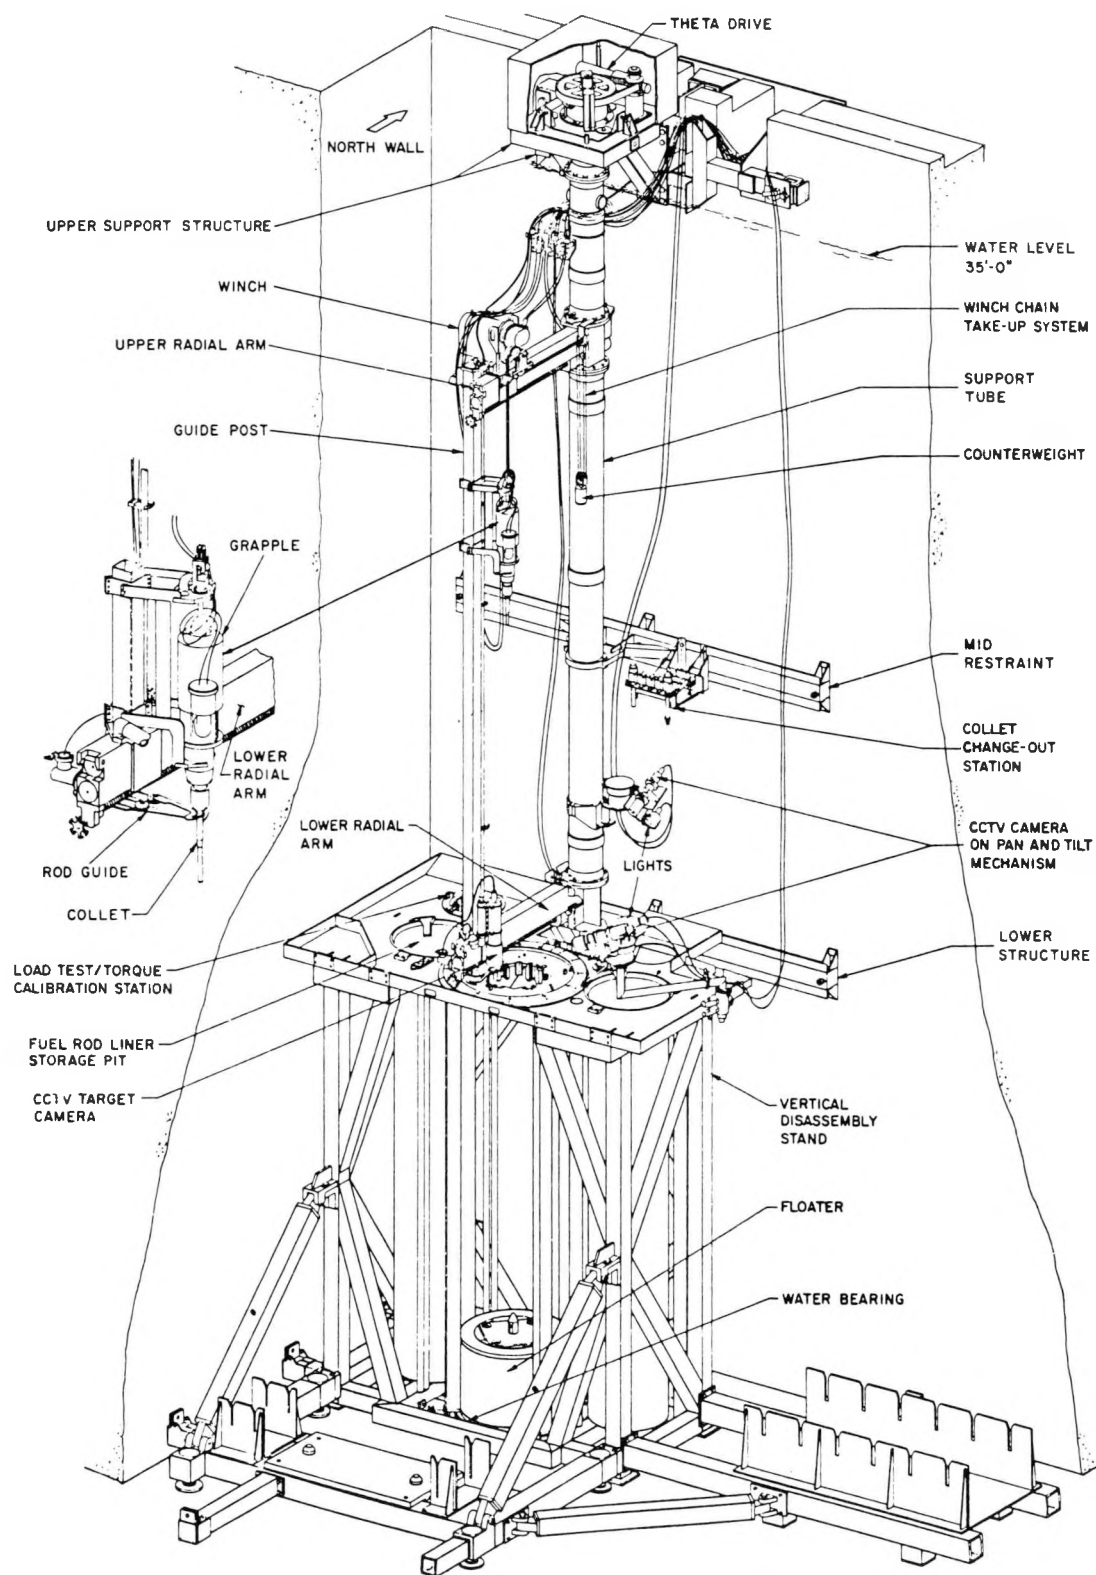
LWBR Rod Removal System and Vertical Disassembly Stand
